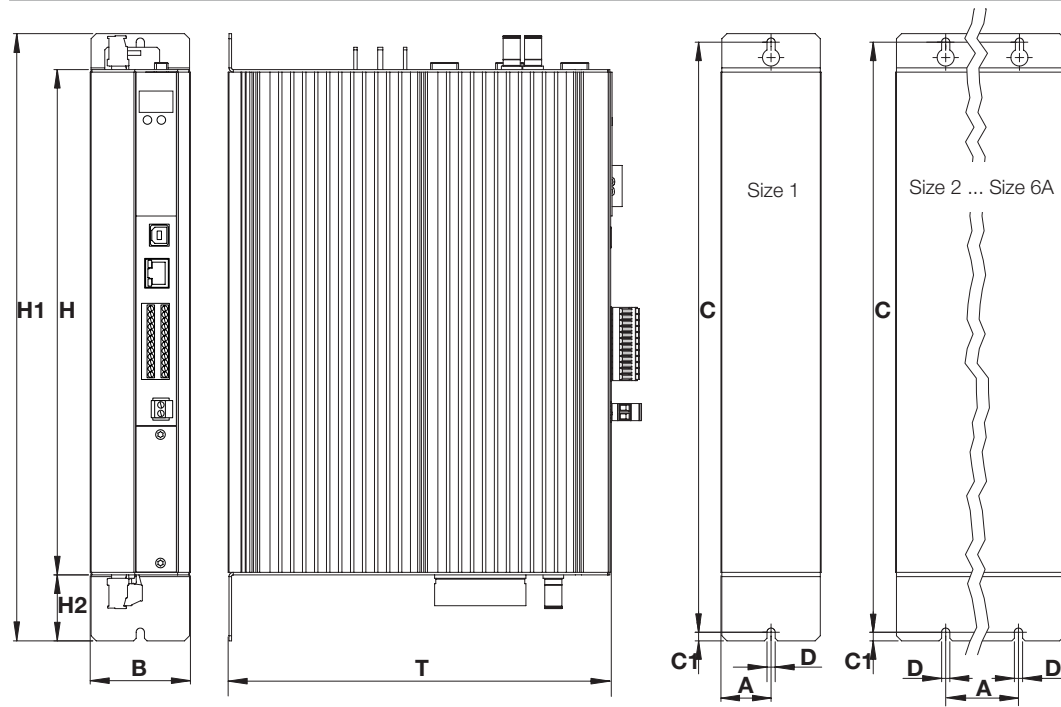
Dimensional drawing, housing with air cooling, schematic depiction for Size 1 to Size 6A
